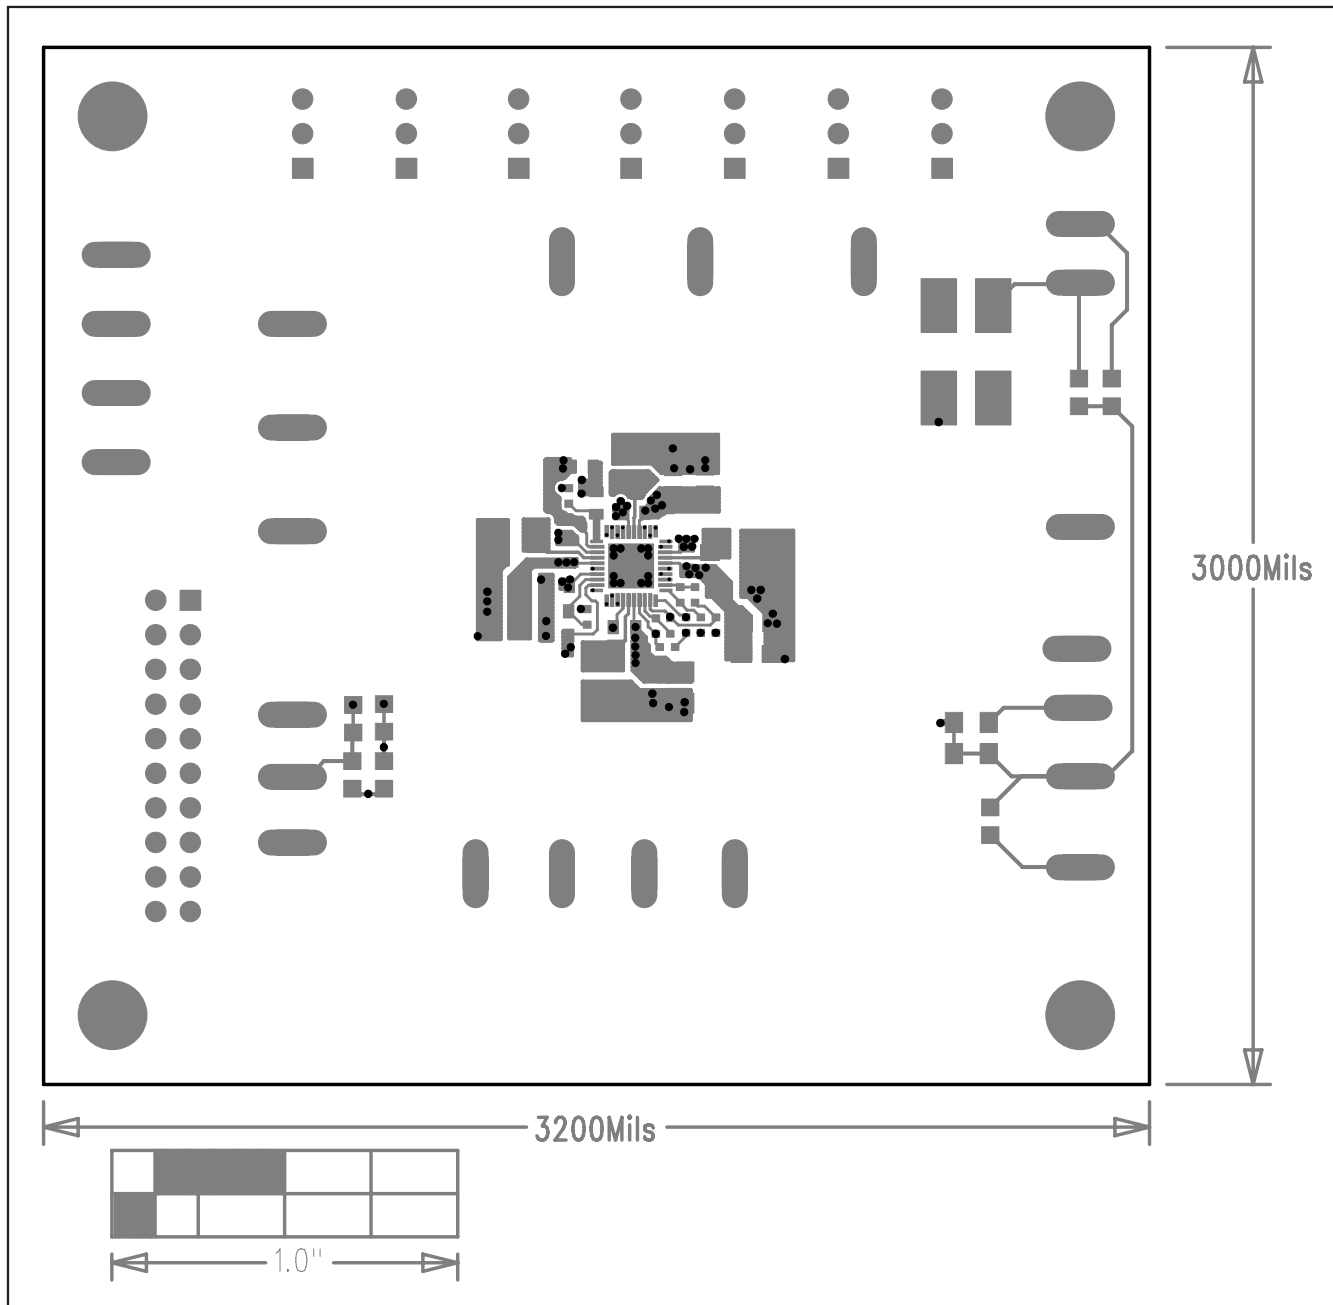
MAX8660 EV Kit PCB Layout—Component Layer 1
